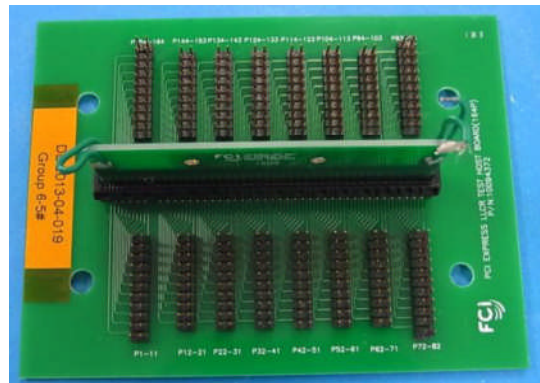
PCI Express Press-fit connector mounted on test board and mated with module card
